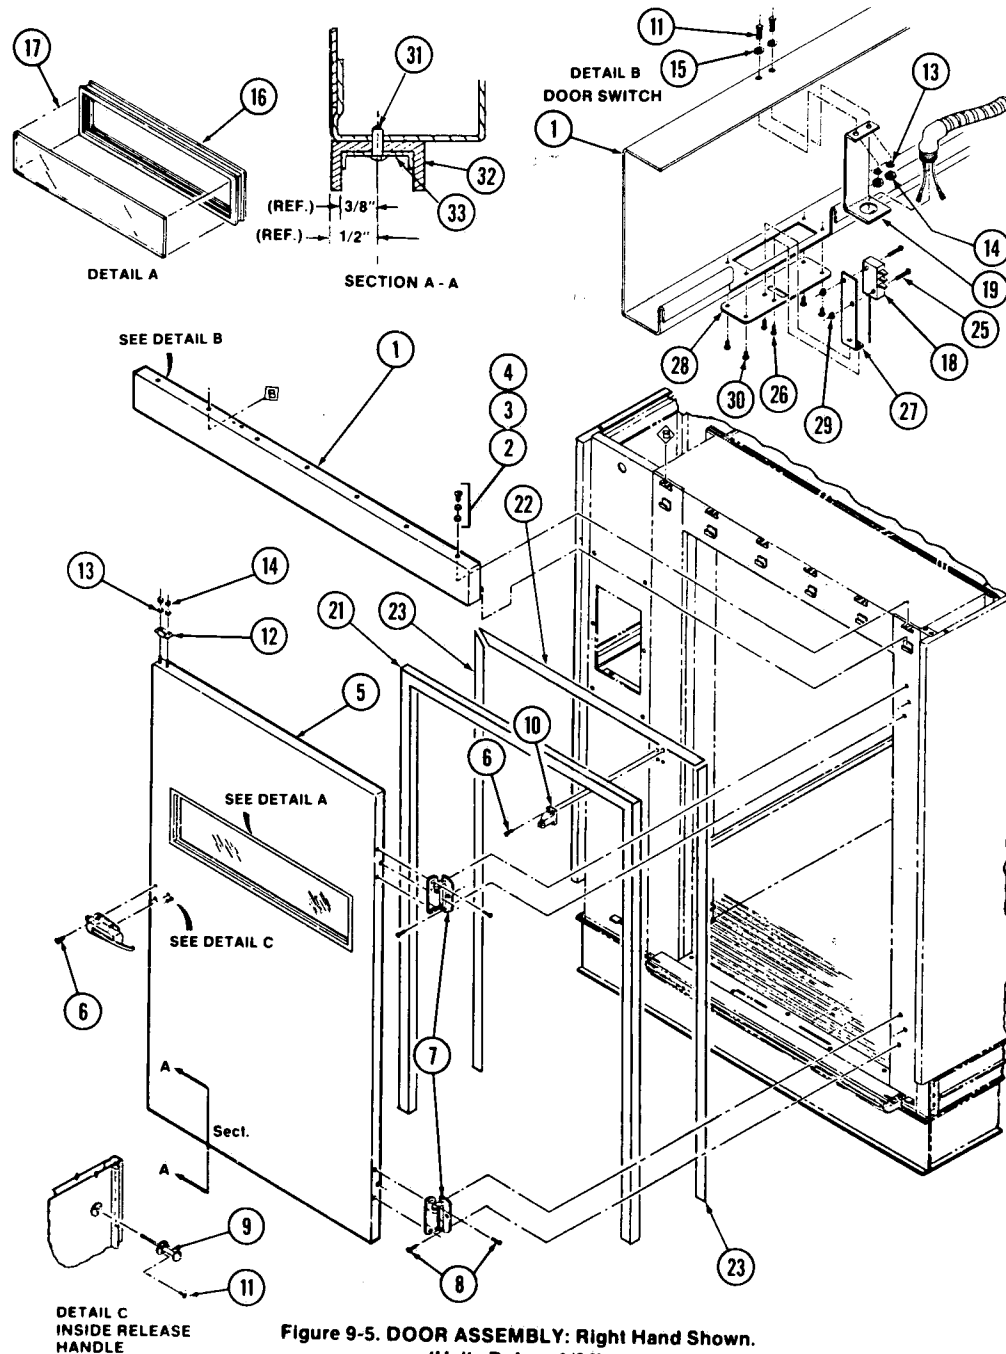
DOOR ASSEMBLY: Right Hand Shown.
